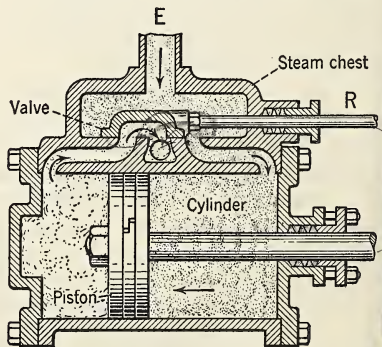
Steam-engine cylinder and steam chest with slide valve.
